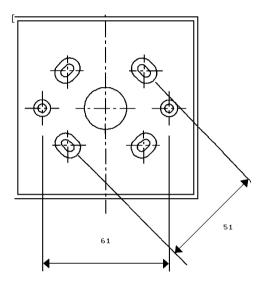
MCP820M Fixing Dimensions Surface Mount Backbox
